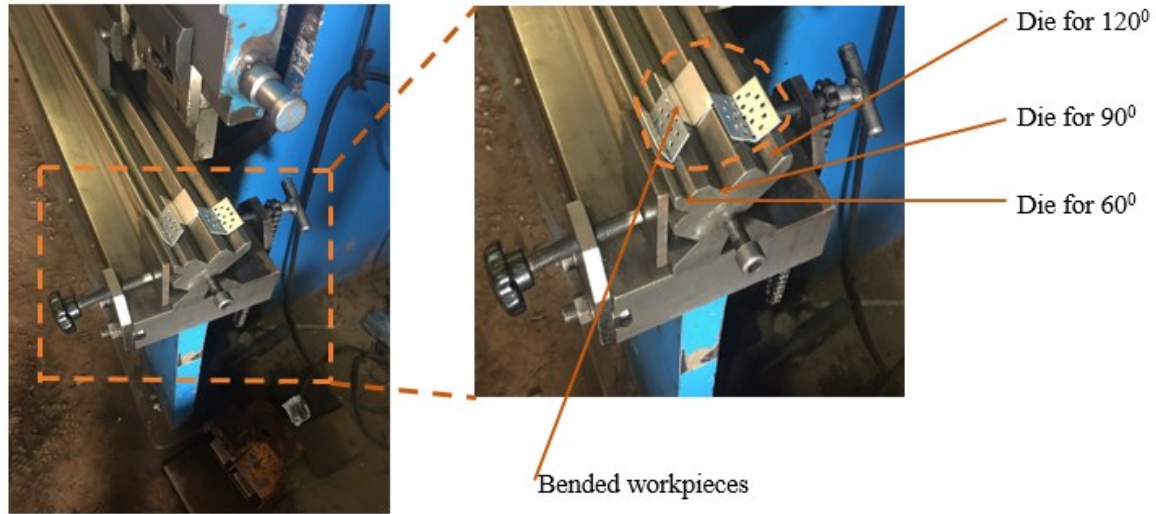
Details of press-brake v- bending process workpieces and bend angles.
